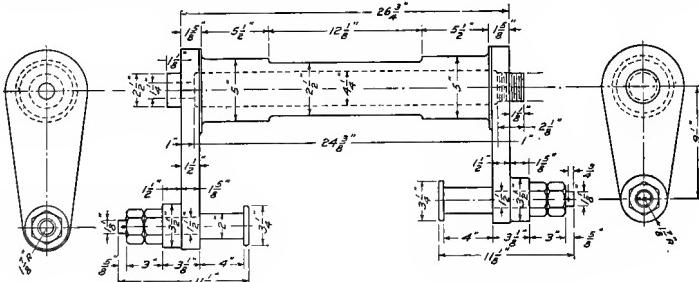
Prob. 47. An incorrect drawing to be checked for errors.
